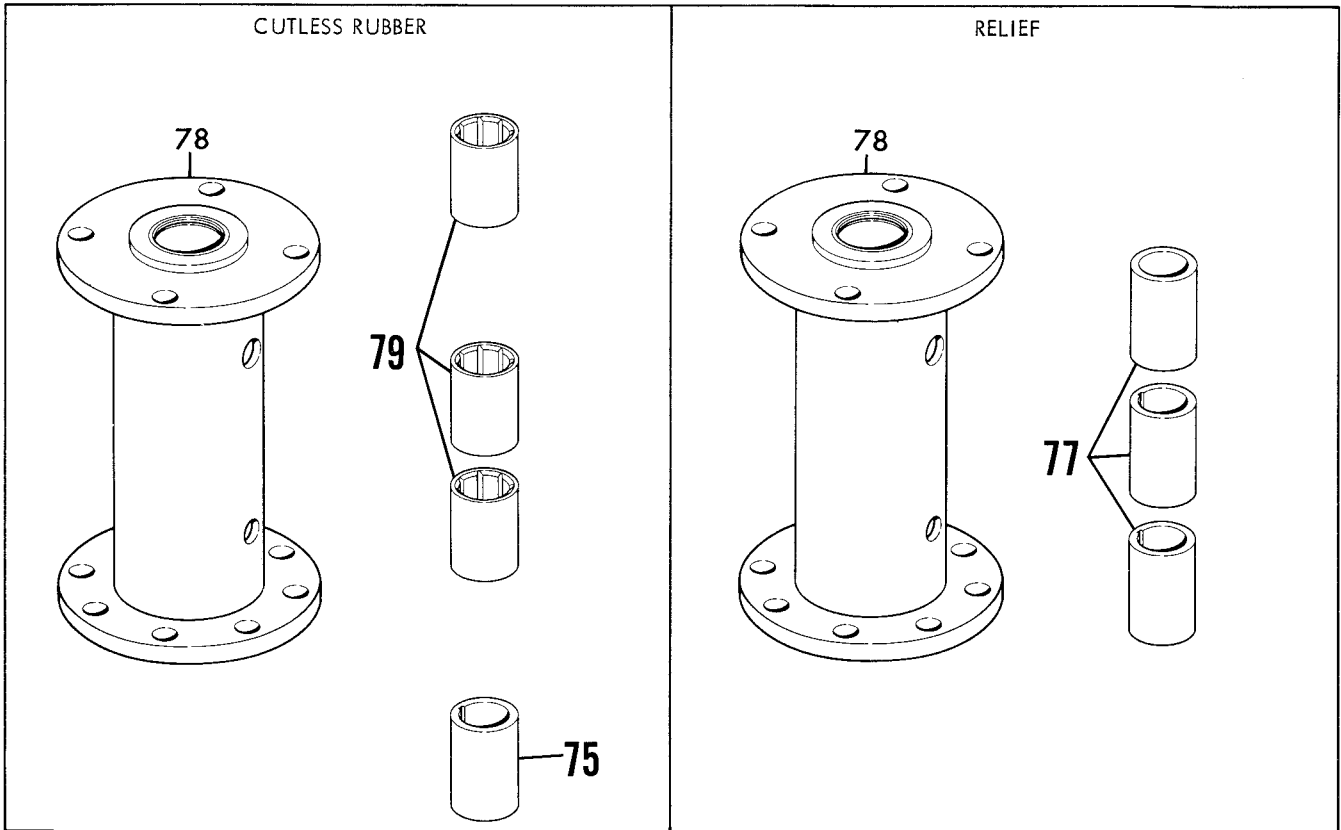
Model 631-632 Exploded View (Sheet 3 of 3)
